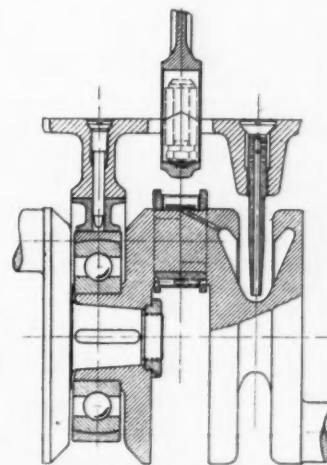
Connecting rod head with V-type joint (Bugatti racing engine)
